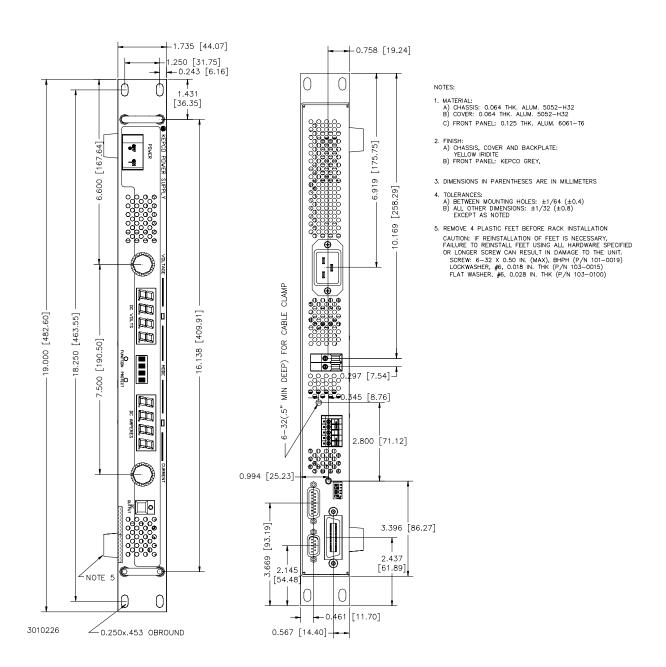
KLP SERIES POWER SUPPLY, MECHANICAL OUTLINE DRAWING (SHEET 2 OF 2)
